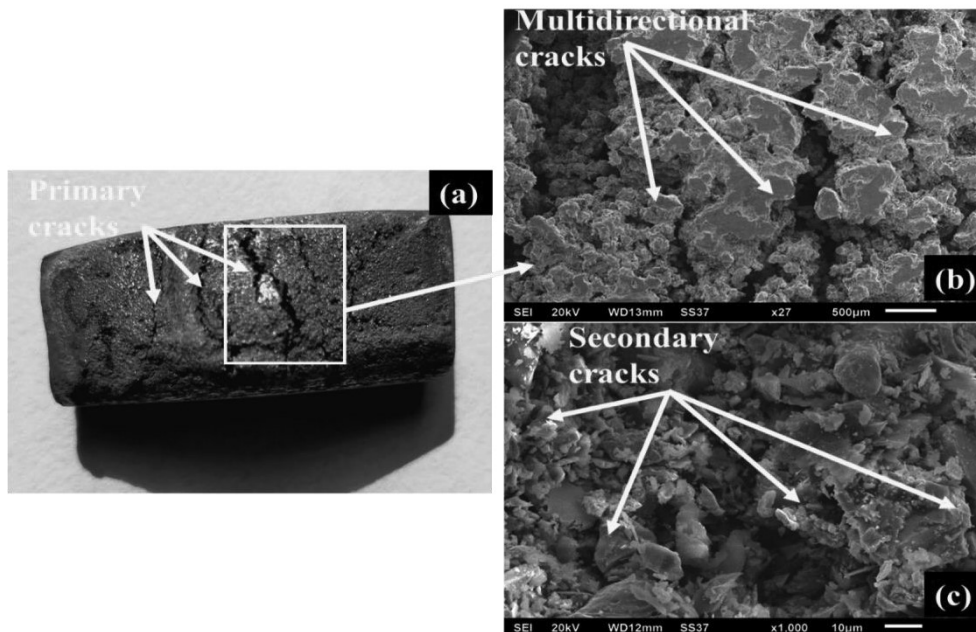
Fractured EWAC-20Cr₃C₂ clad specimen after 3-point bend test (a) Photograph of the top surface; SEM micrograph showing (b) primary cracks (c) secondary cracks
